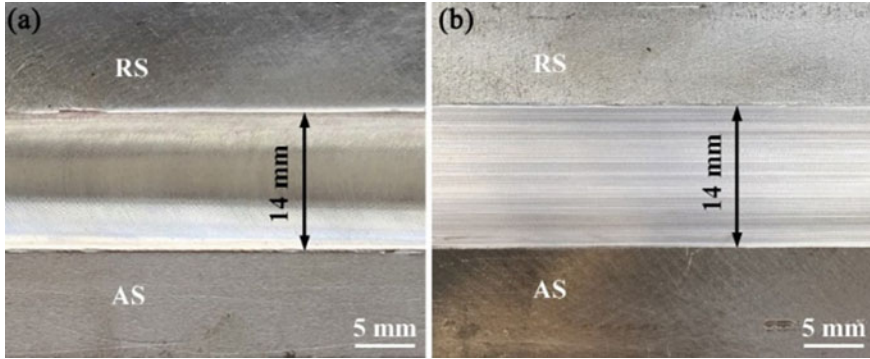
Surface appearances of a typical PFSW joint: a upper surface and b lower surface [68]
